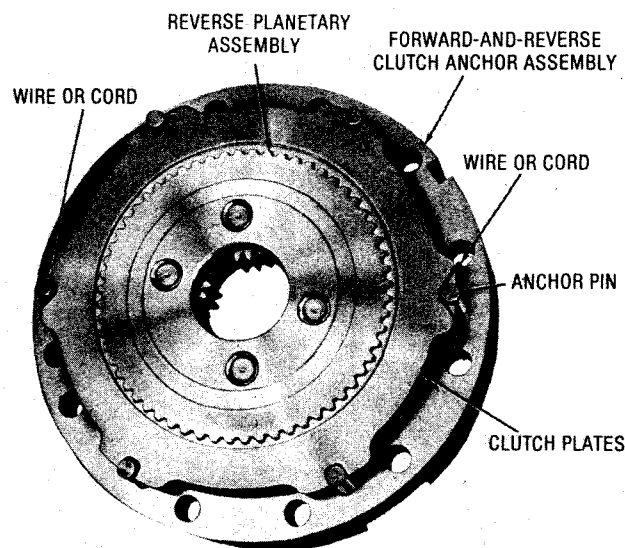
Reverse clutch plates and planetary wired in position on forward-and-reverse clutch anchor
